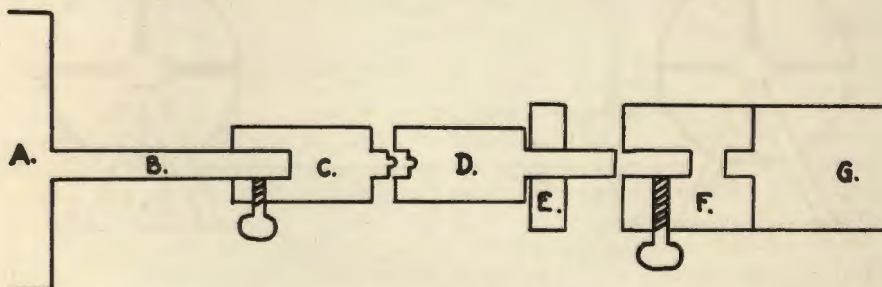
Drive-shaft for moving axle of cylinder X in fig. 3. A = motor; B = driving axle of motor; C and D = sections of drive shaft which can be separated whenever necessary; E = bearing; F = "cap" fitting on D; G = axle of cylinder X.
